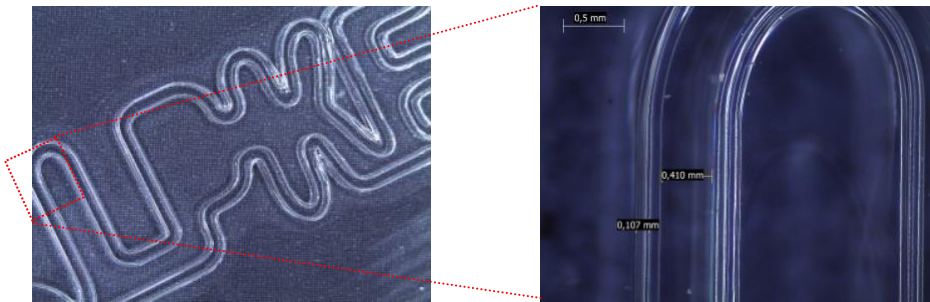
(a) Welded LPKF trade show demonstrator, (b) microfluidic canal surrounded by very fine weld seams.
